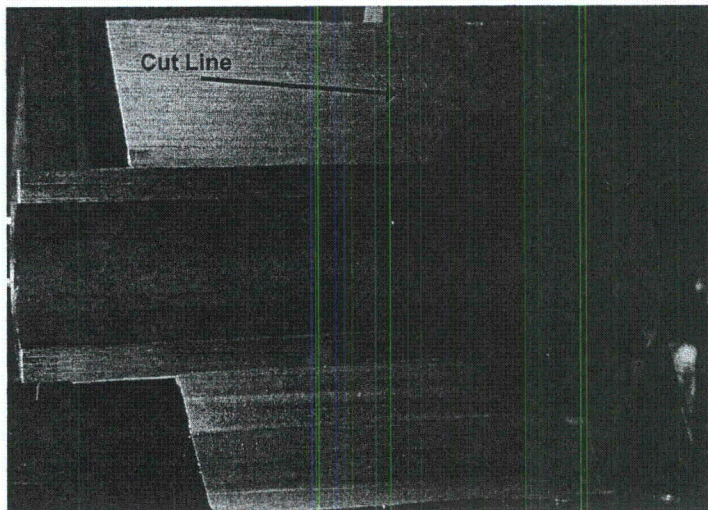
J-groove Weld Removal Cut Line Placement
